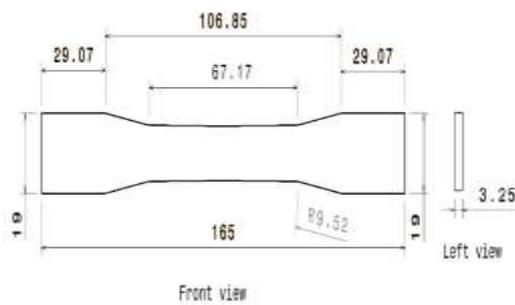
Tensile Test Specimen (All dimensions are in mm)
